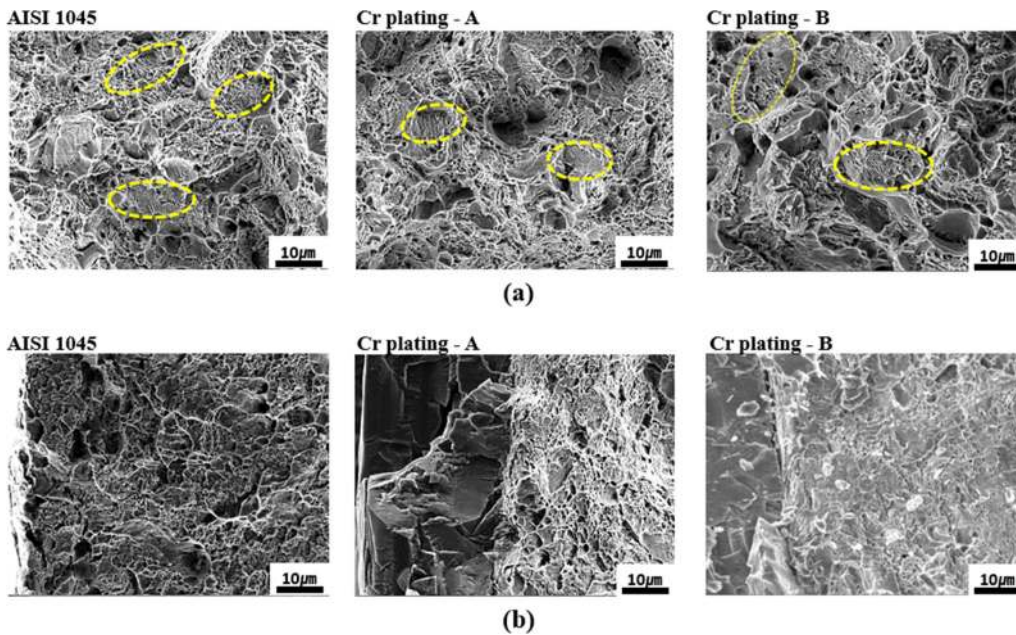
Tensile fracture surfaces of AISI 1045 steel and Cr plated AISI 1045 steels; (a) Inside area, (b) surface area
